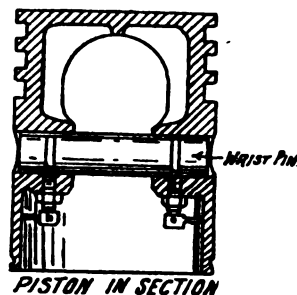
Sectional view of piston. Note wrist pin is stationary.
